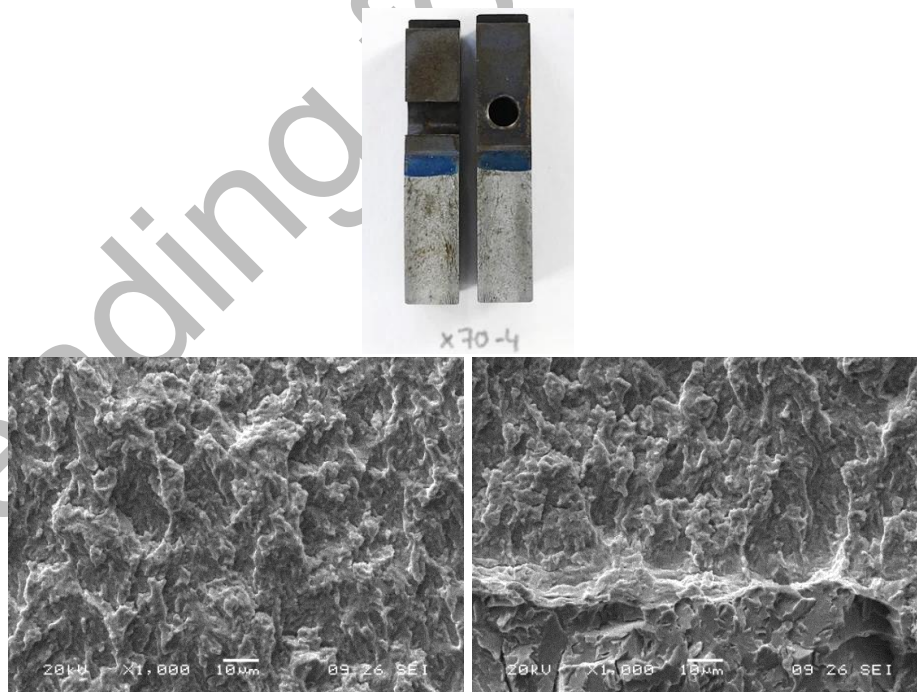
Heat tinted fracture surface of tested CT-WOL X70 specimen (up) and SEM micrographs of the fracture surface in the fatigue pre-crack and in the crack front (down)
